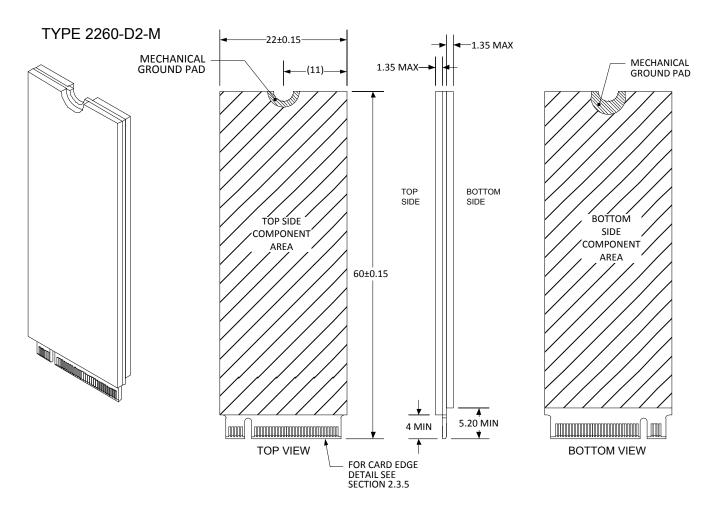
M.2 Type 2260-D2 Mechanical Outline Drawing Example
